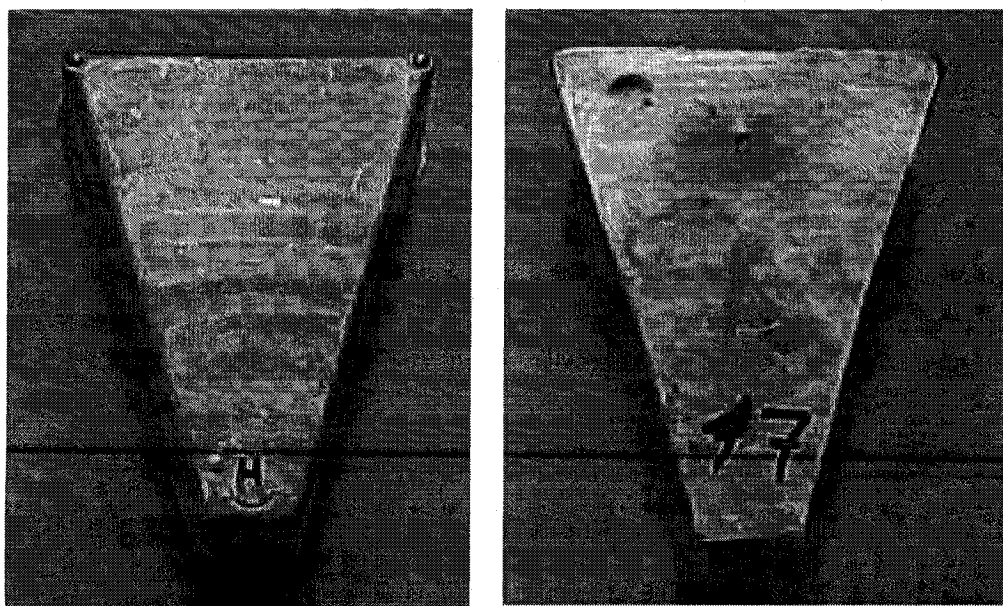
Magnesium casting produced with heat pipe cooling (H1)
